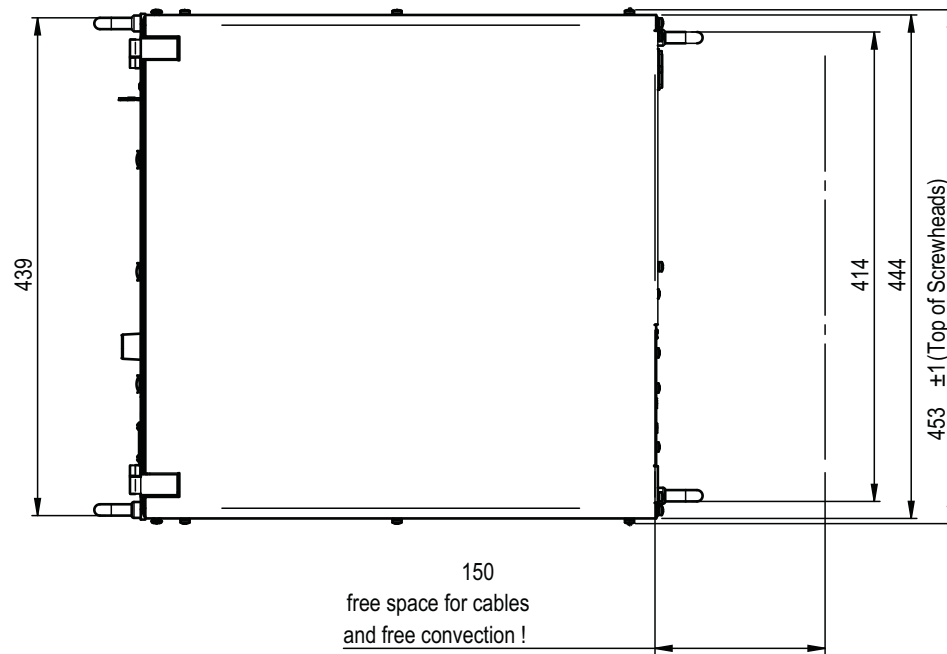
Paladin Scan Head Dimensions (Sheet 2 of 3)
